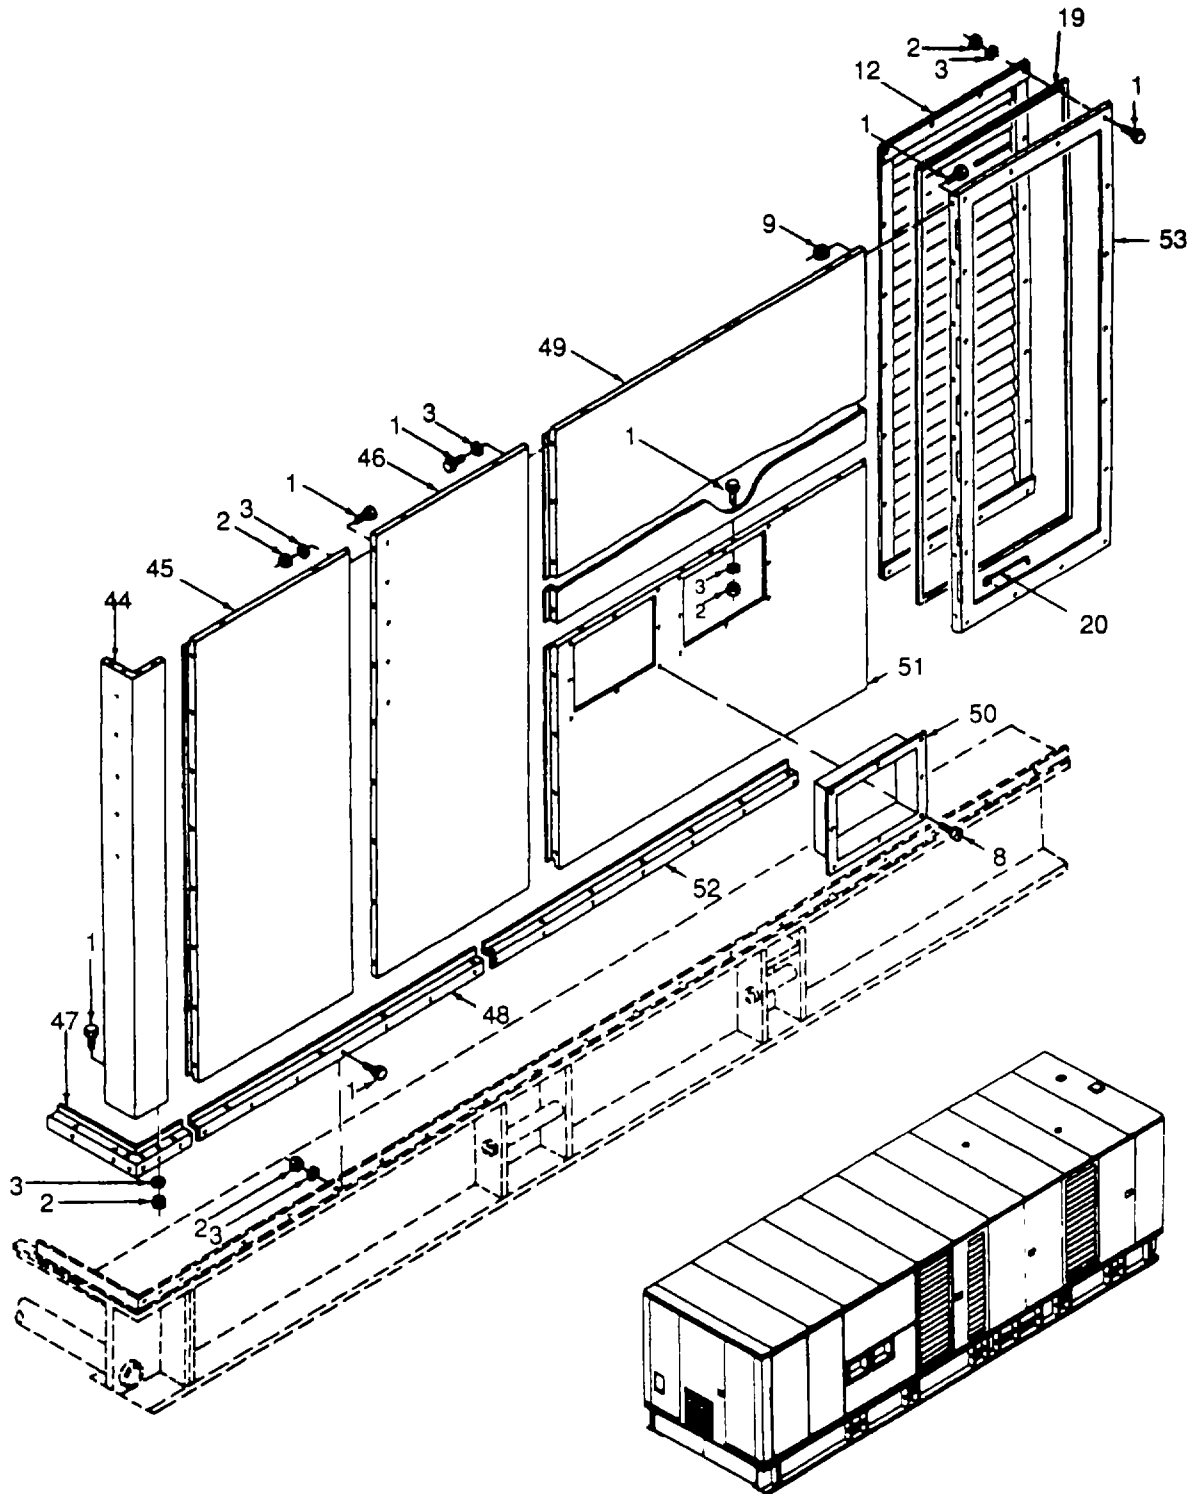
Access Doors and Shutters (Sheet 4 of 6)
